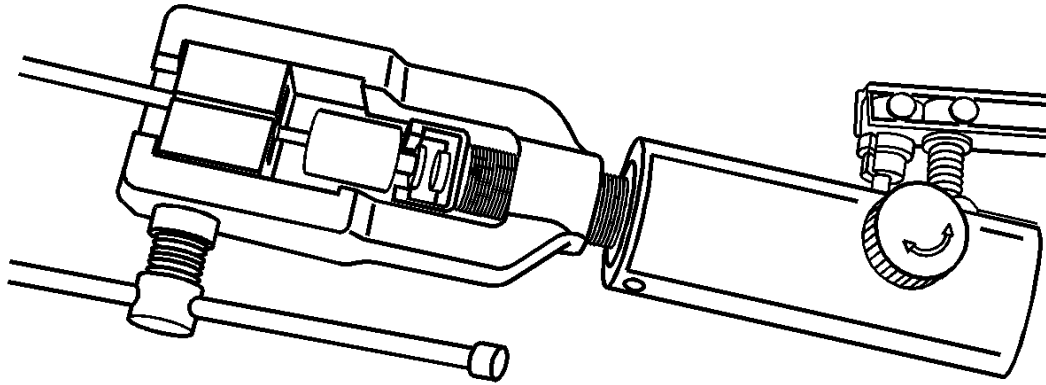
Rotating J 45405 To Bottom Against Die Cage
